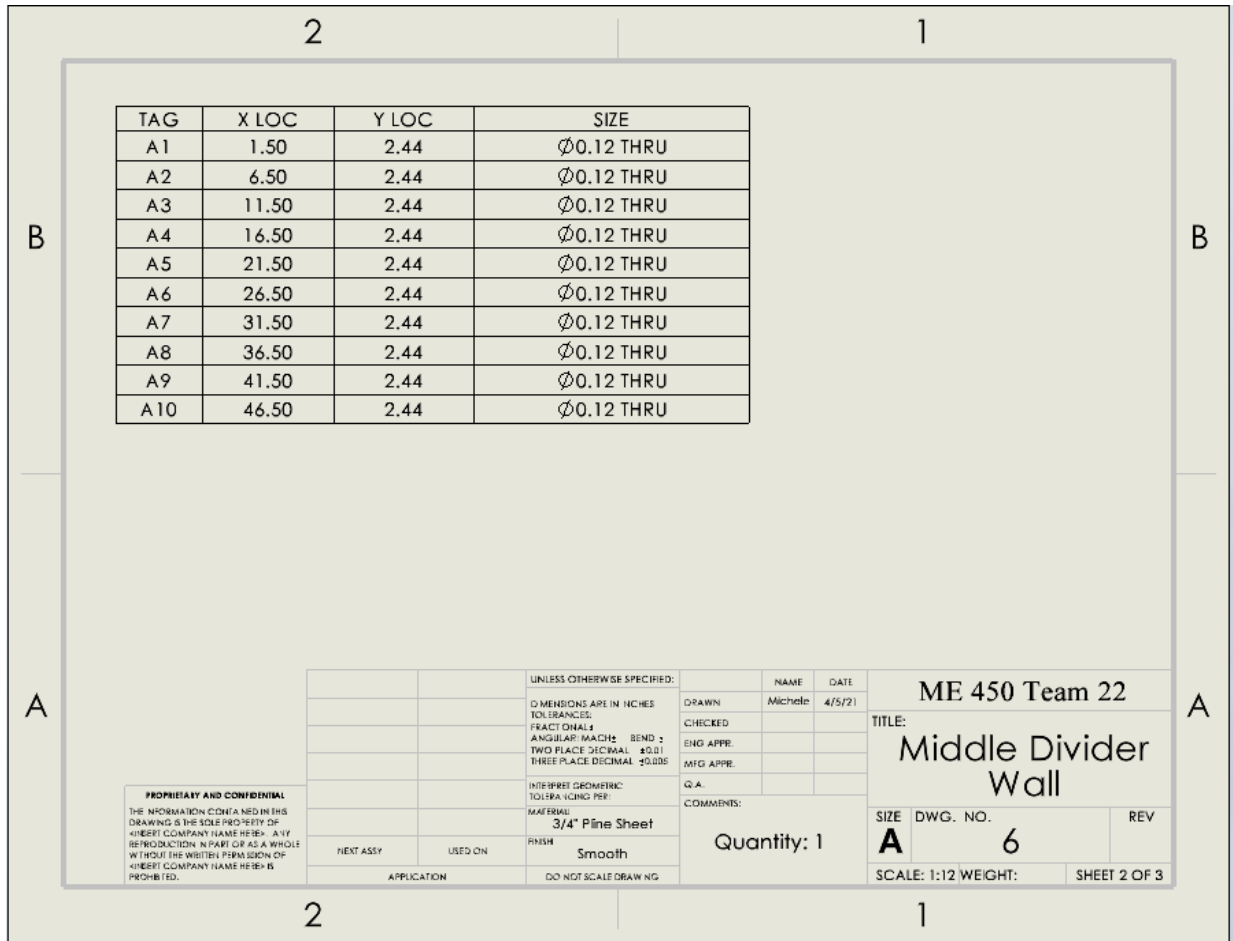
Engineering Drawing of the Middle Divider Wall.
